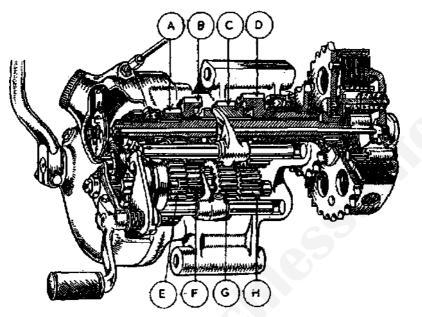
SECTION THROUGH GEARBOX SHOWING GEARS AND CLUTCH WITH ACTUATING MECHANISM.
